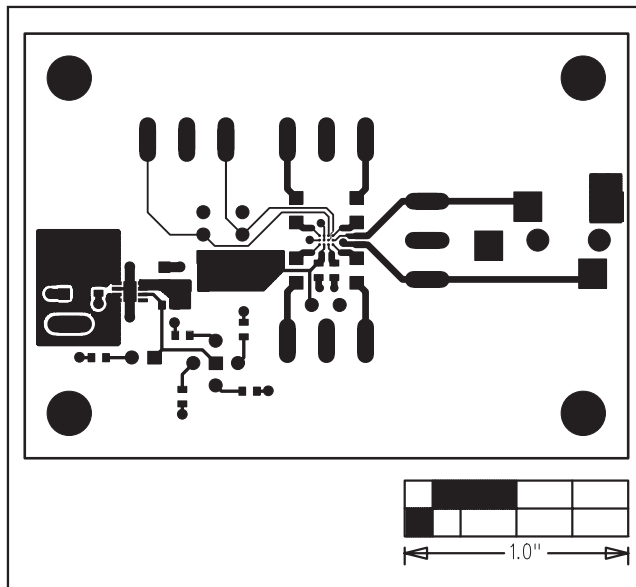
MAX14504 EV Kit PCB Layout—Component Guide
